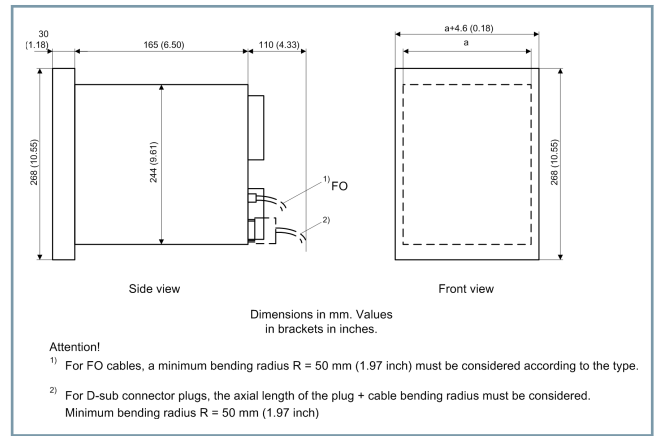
/4 Flush-Mounting Devices, Dimensions from the Side and Front Views
